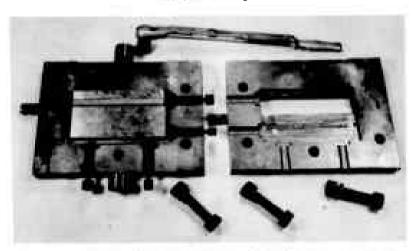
Welding Fixture for Holding Wheel-and-Bucket Design Test
